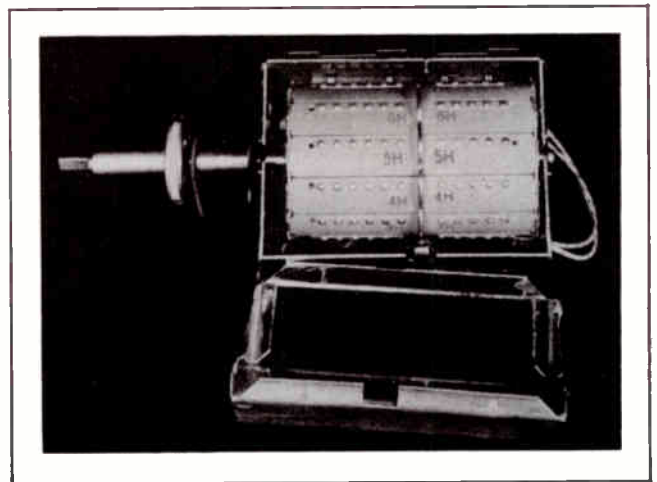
Oscillator and RF Mounting Strips positioned on turret of Standard Coil tuner.
